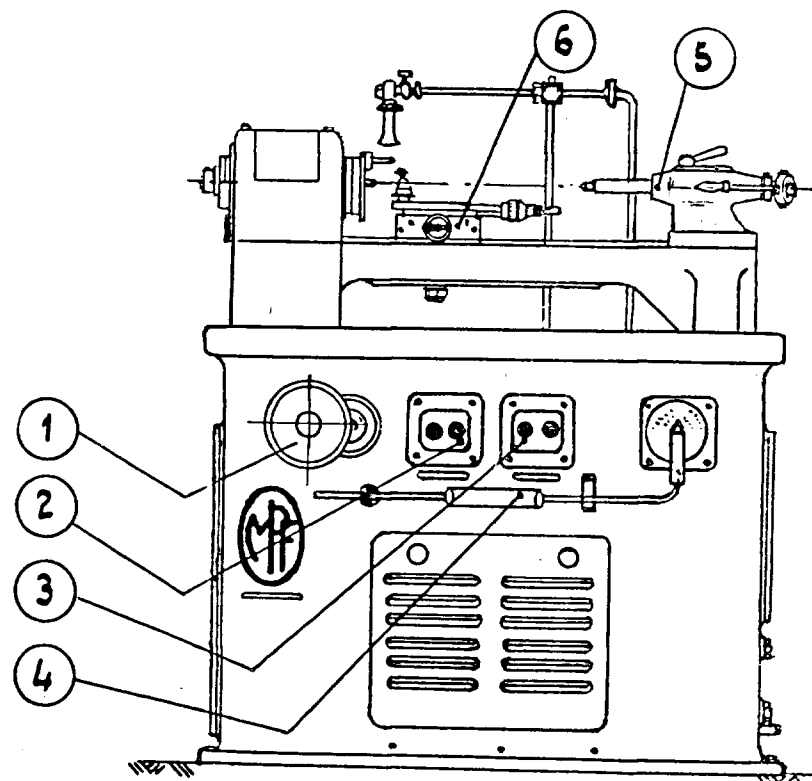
Cabinet Lathe - CBL - 4-1/2".
